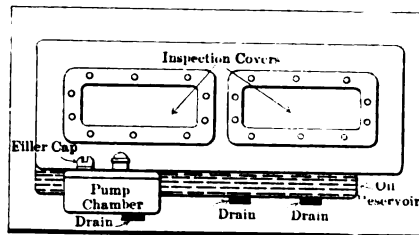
Paige-Detroit crankcase, showing inspection covers on side of crankcase and location of oil reservoir
